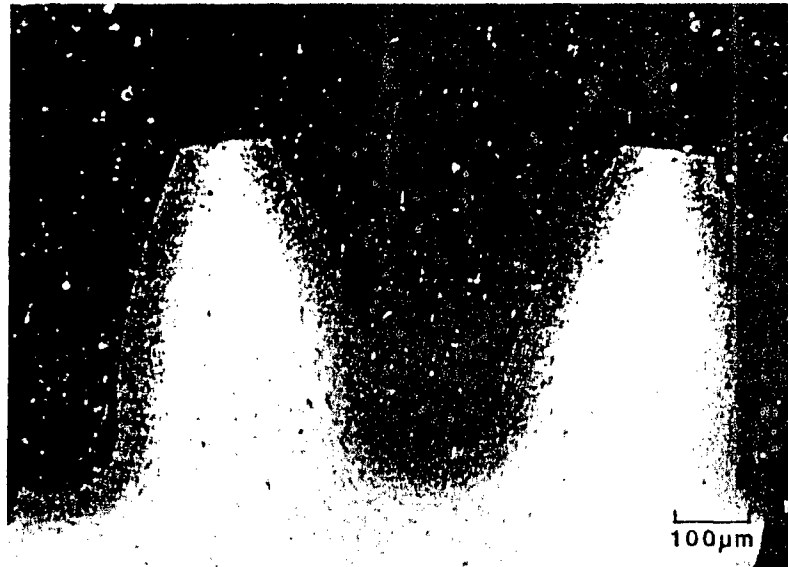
Macroetched View of P/M Forged 4620 Gear Showing the Carburized Case.
